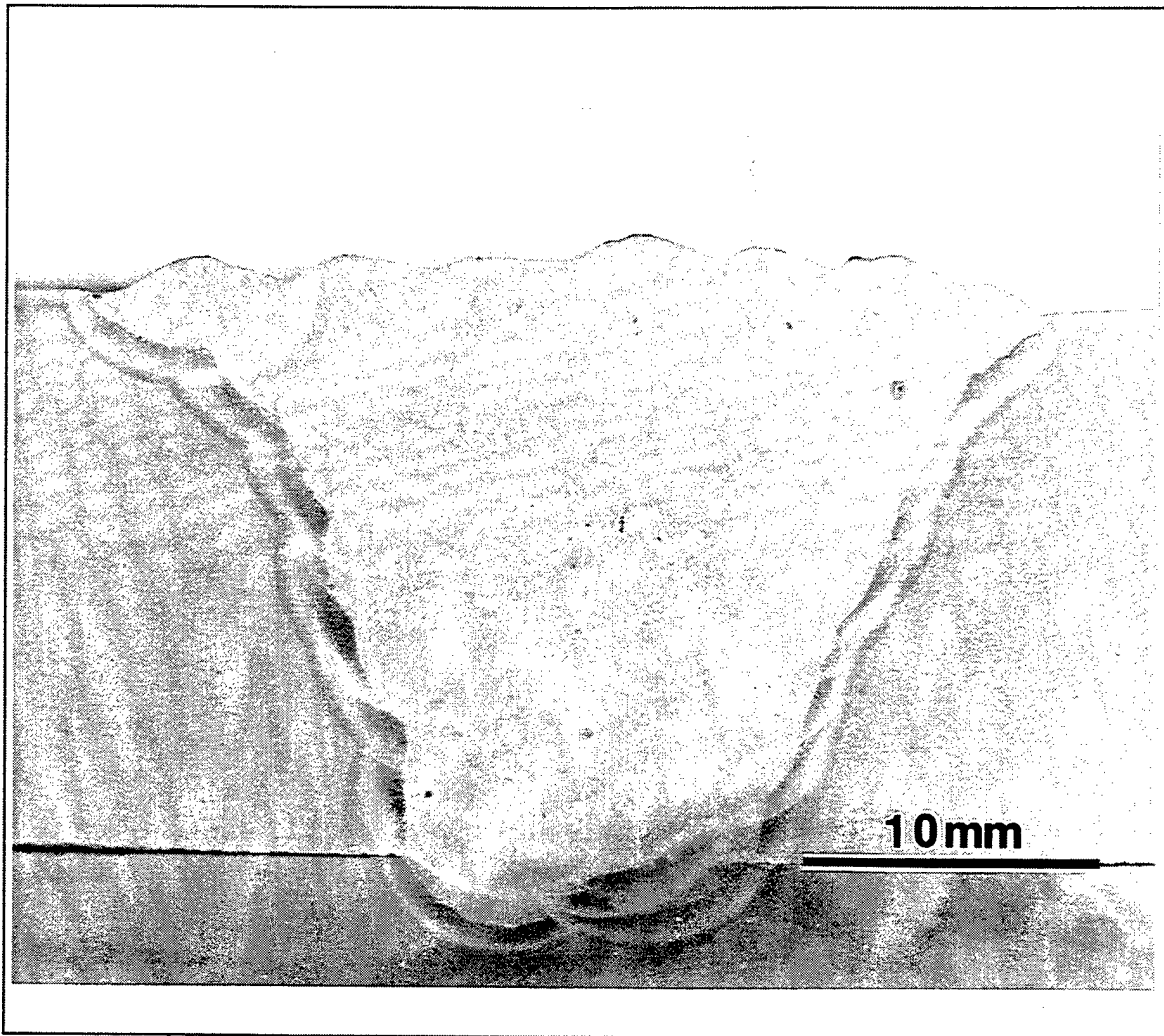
Macro photograph of UWW31 weld sample. Welded at a depth of 7.3m in freshwater and at a temperature of 31°C.
